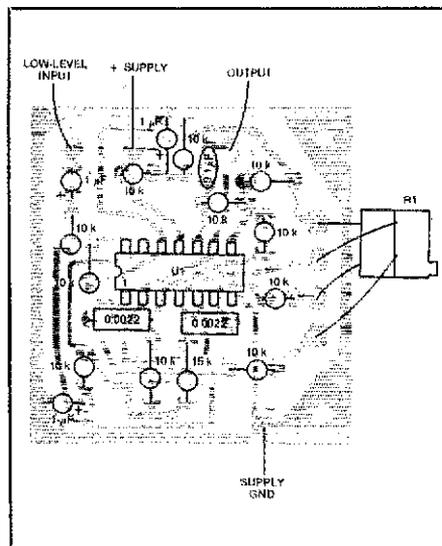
A parts-placement diagram, shown from the component side of the board. Gray areas show an X-ray view of the copper pattern.
